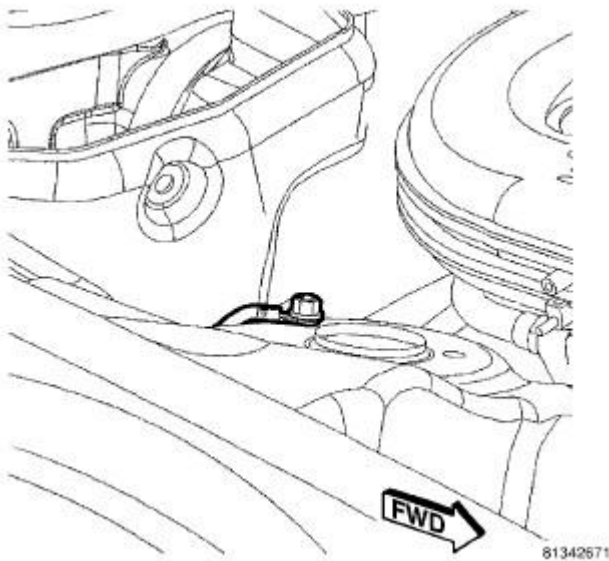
Fastener Securing Negative Battery Cable To Right Front Strut Tower
